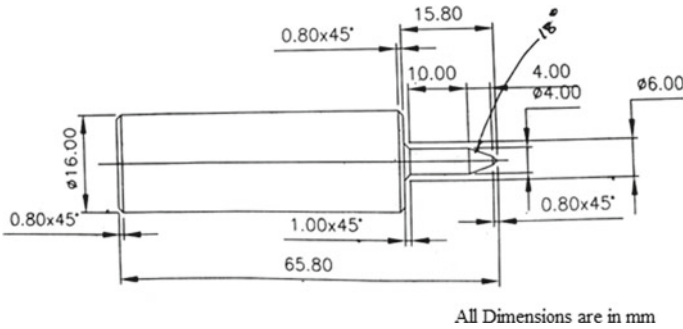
Preferable tool dimension for friction drilling (Source [22], p. 471)
